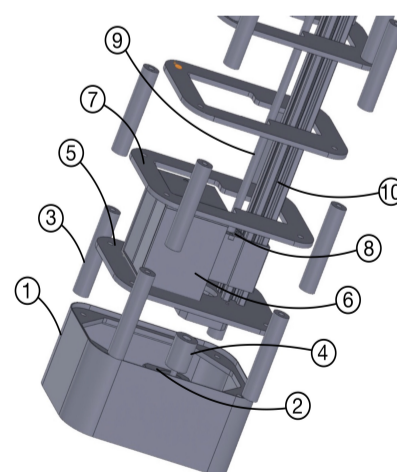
Exploded view of the elevator model: (1) Bottom skirt, (2) Stepper motor, (3) Tube spacer, (4) Flex axle, (5) Bottom floor, (6) Cabin + Cabin door setup, (7) Mid floor, (8) Lead nut, (9) Threaded rod, (10) V-slot RatRig profile.
